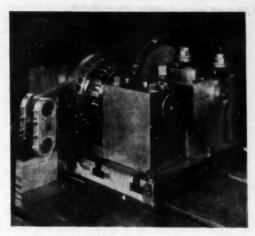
Fatigue testing of gear teeth is a typical example of simulated service testing with Baldwin-Sonntag universal fatigue machines. Holding fixtures are all standard parts except the black holding the stationary gear.
